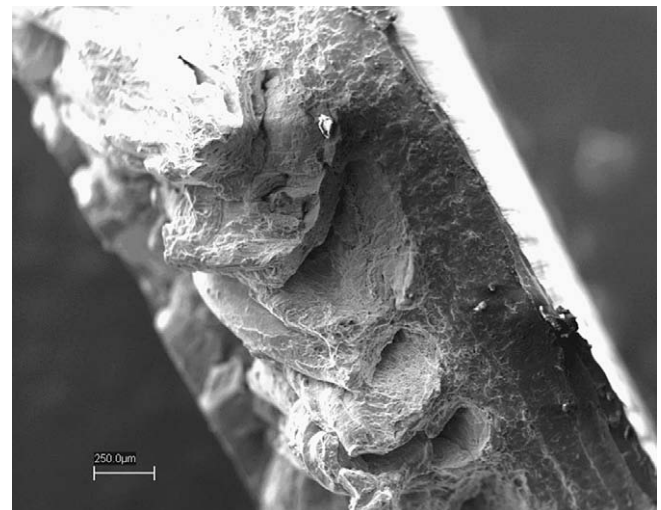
Fracture surface of the joint welded at 1000 RPM 230 mm/min.
